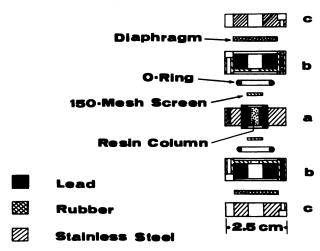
Cross-section view of <sup>99m</sup>Tc point source. Piece b fastens to piece a, and piece c fastens to b, each with three Allenhead screws on common diameter.
